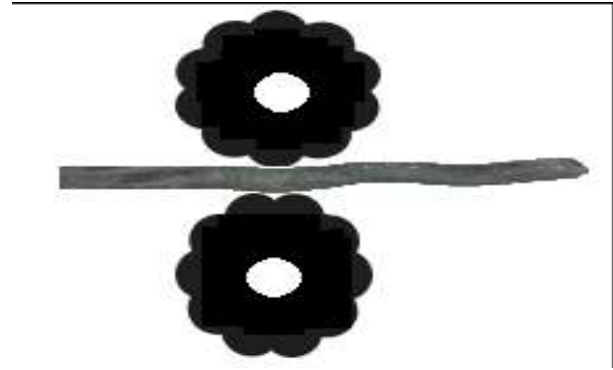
Achieving deformed configuration of bar at rolling mill at final stand
